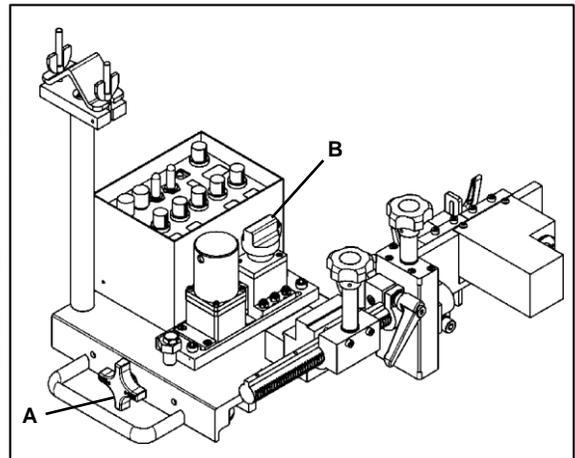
Location of Wheel Engagement knob (A) and Master Drive Clutch knob (B) on K-BUG 6000.
